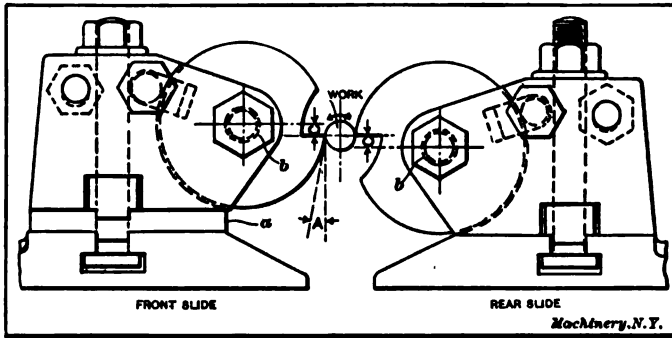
Circular Form Tools and Holders showing Location of Center of Tool in Relation to Center of Piece being formed
